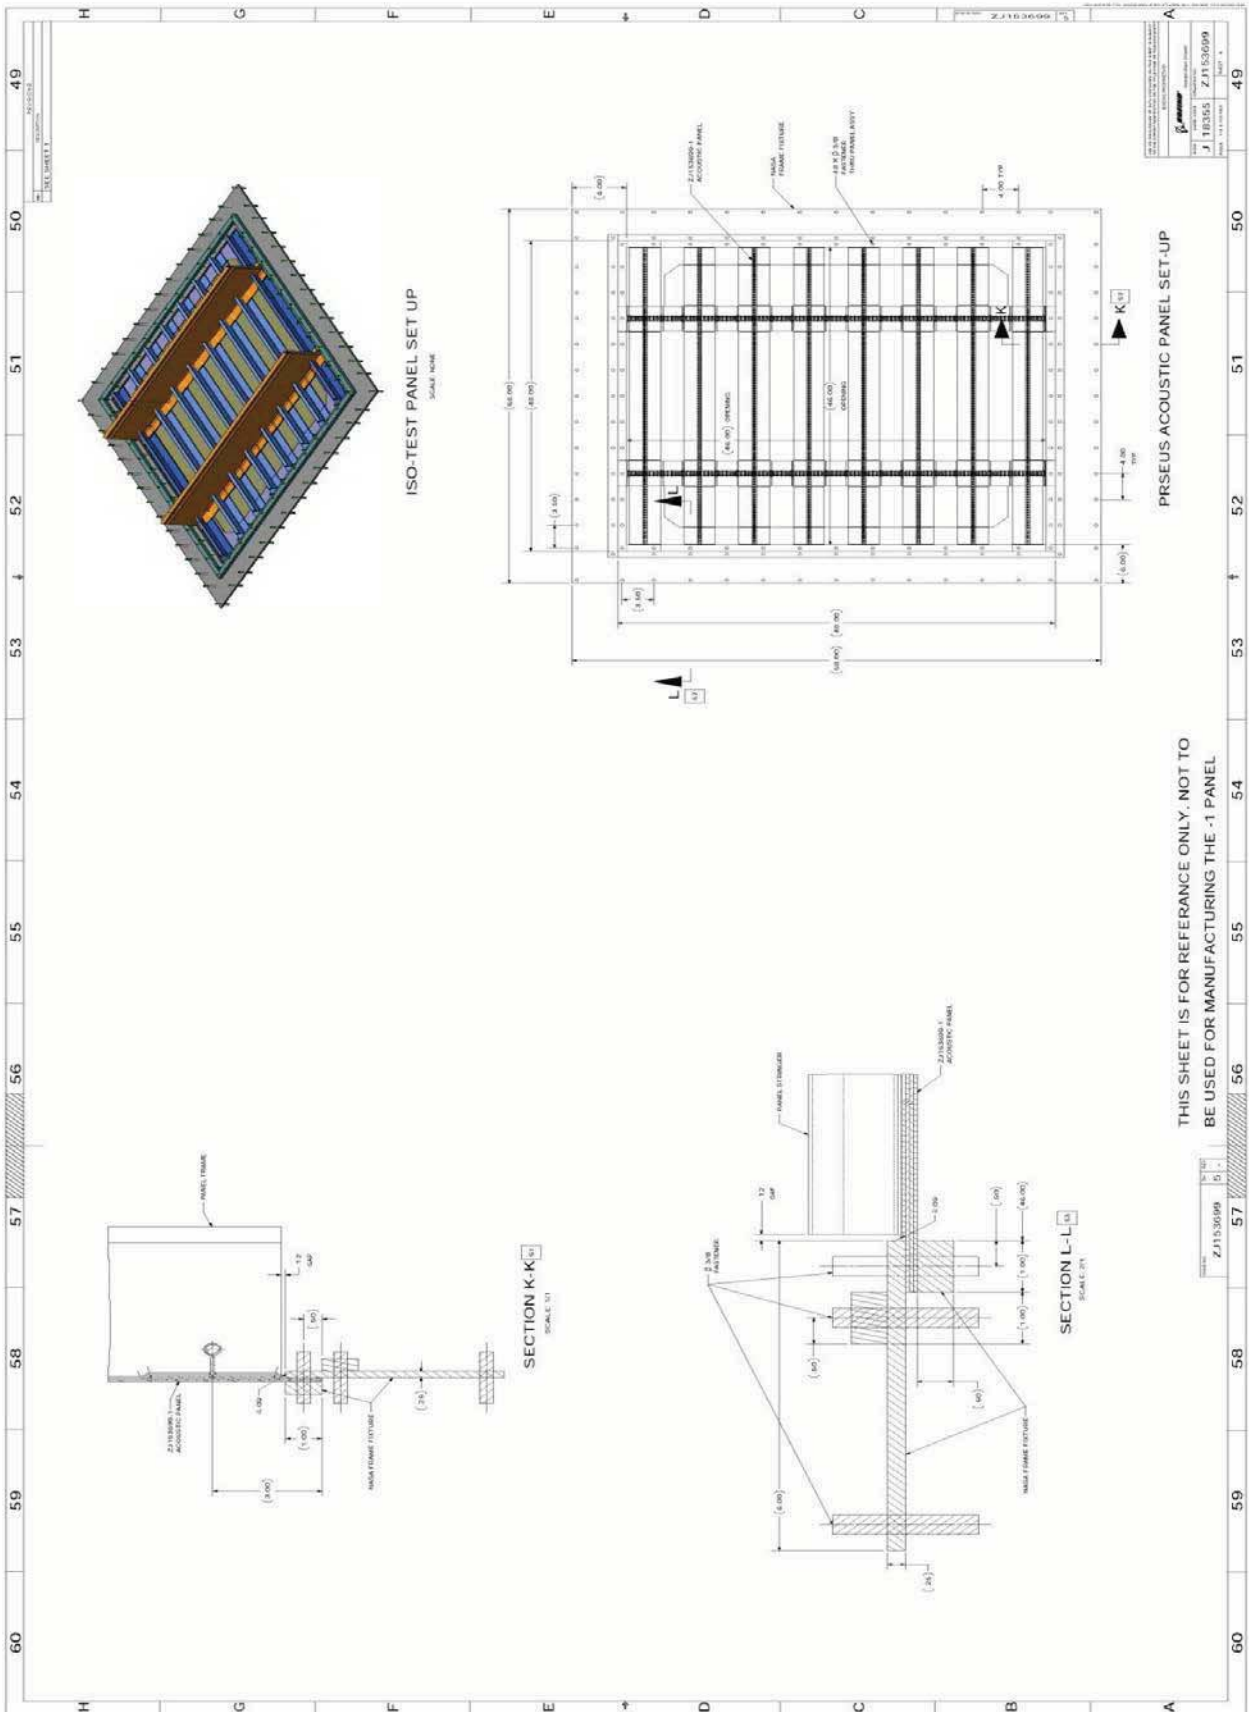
SPECIMEN DRAWING SHEET 5 OF 5
